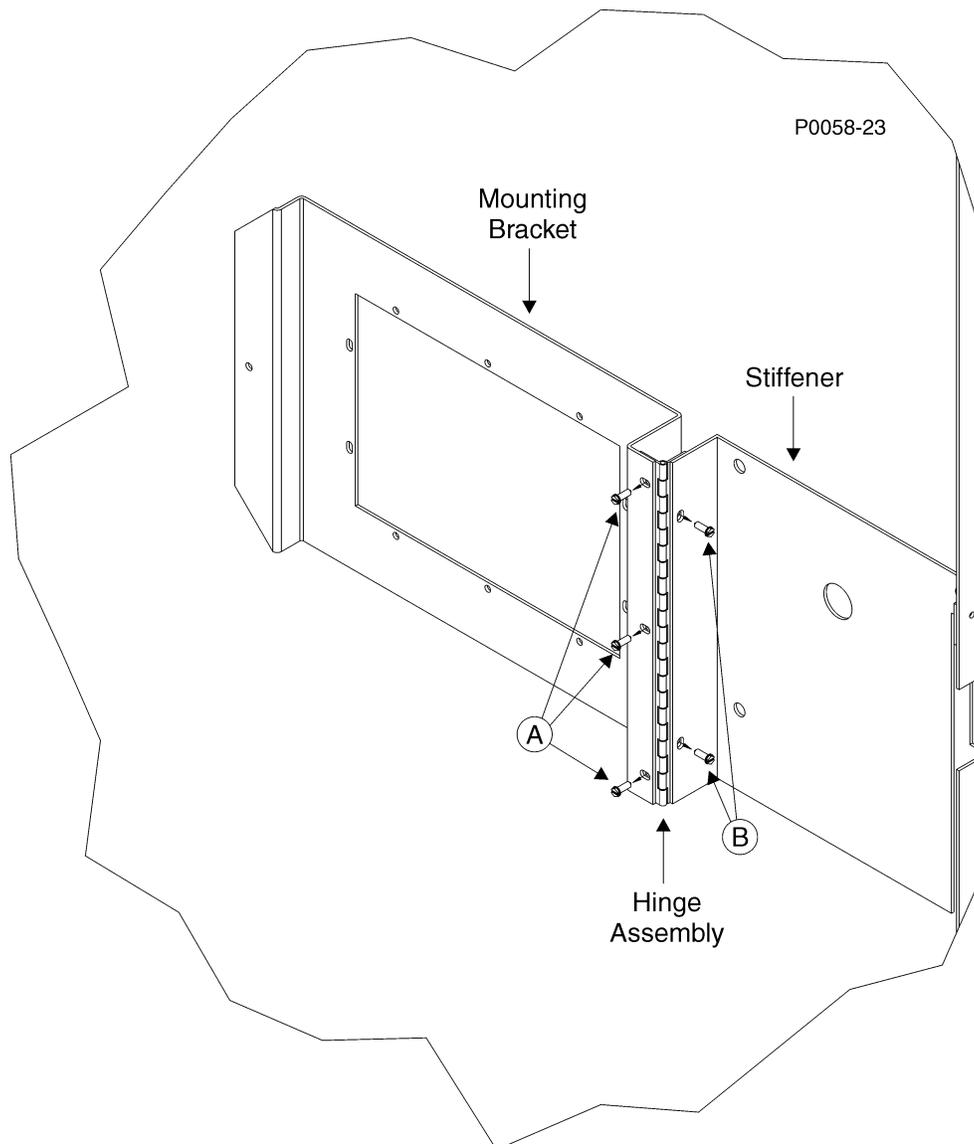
Removal of Display Panel Mounting Bracket and Hinge Assembly
